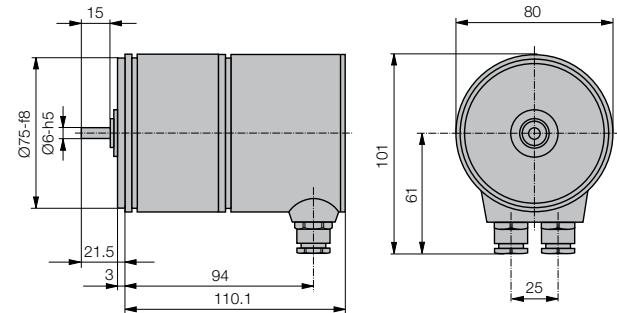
Basic unit with additional gear (fixation see Fig. 13).
